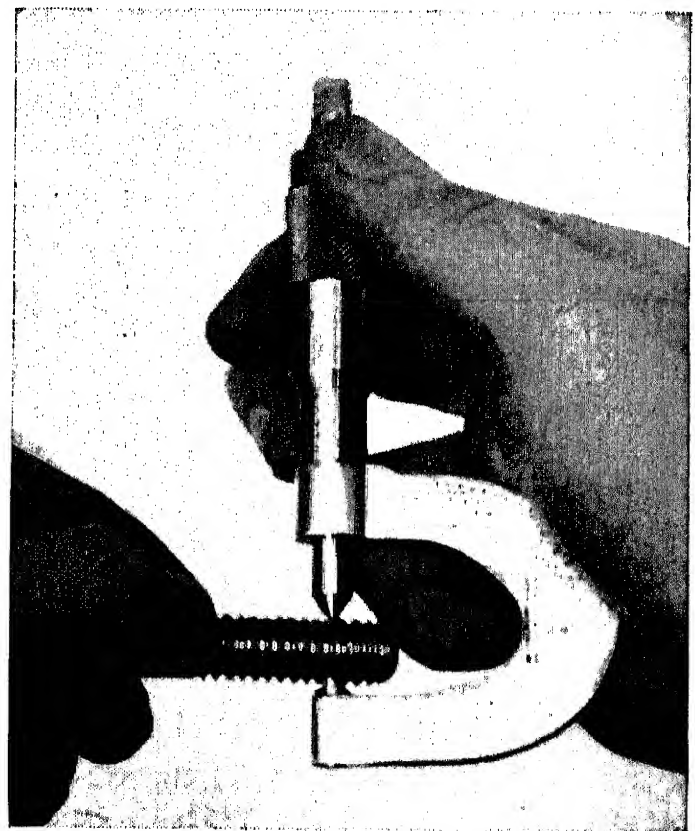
Measuring a screw with a screw thread micrometer. (Courtesy Brown and Sharpe Mfg. Co.)
